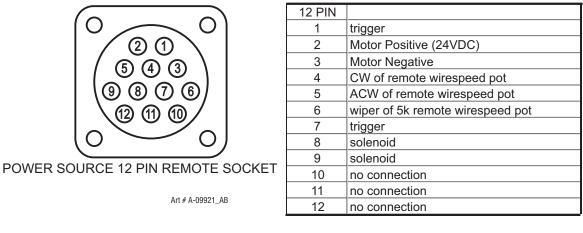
WeldSkill 250 & 350 MIG Remote Socket
